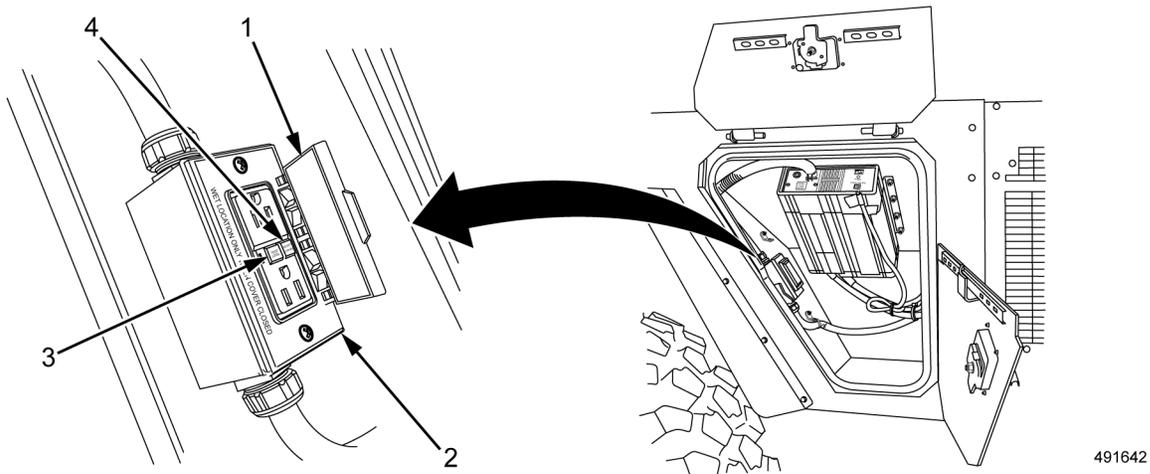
Outside Stowage Box 110V Outlet and GFCI.
